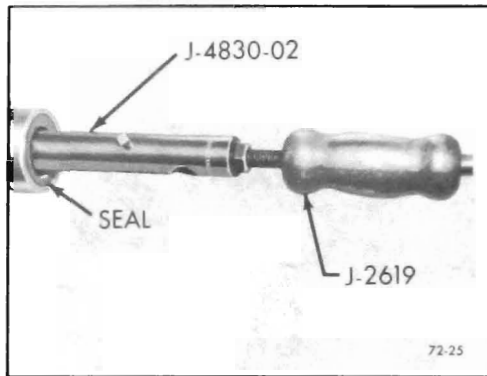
Removing Rear Bearing Retainer Oil Seal
